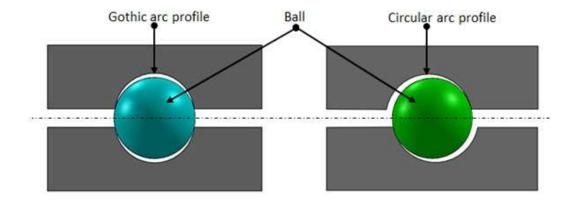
Thread Forms Used in Recirculating Ball Screws
